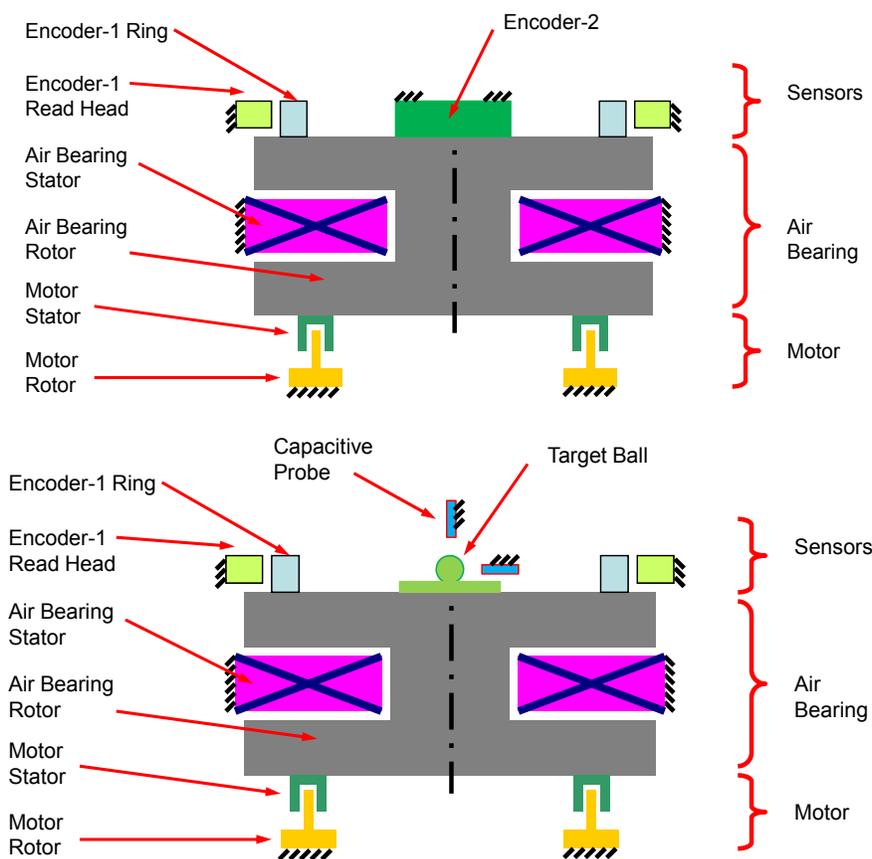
Schematic view of mechanical configuration design - sensors on top (top: with two encoders, bottom: one encoder and DMS)
